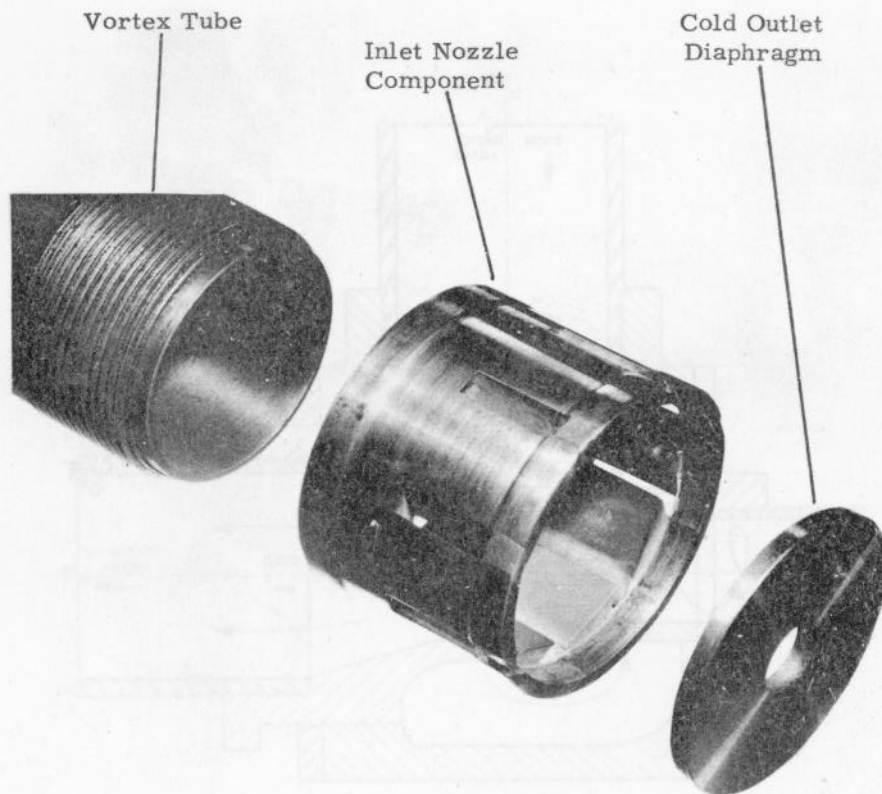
EXPLODED VIEW OF COLD OUTLET DIAPHRAGM,
